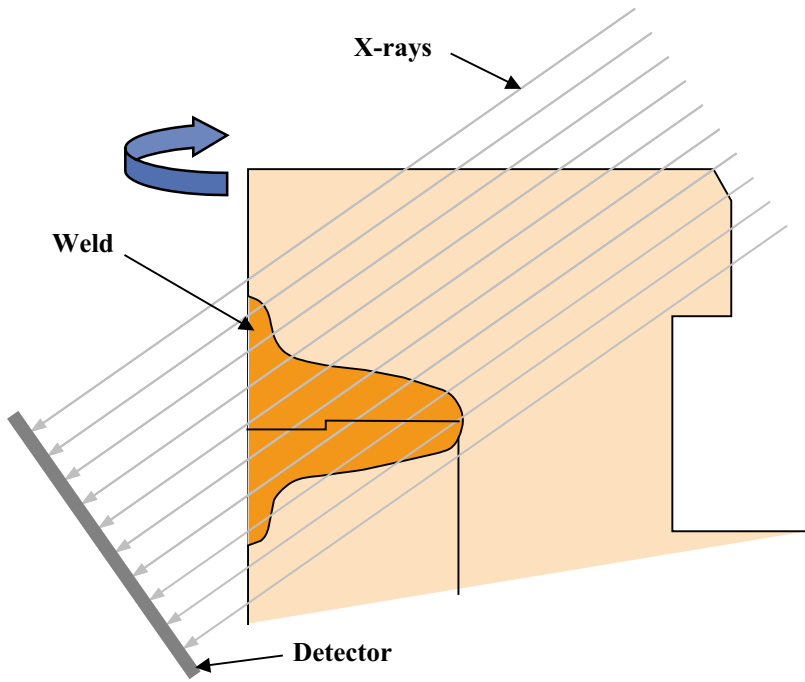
Schematic illustration of radiographic testing of weld.
